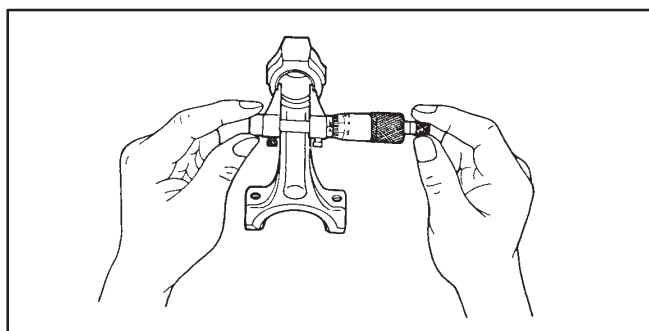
MEASURING CONNECTING ROD PISTON PIN BORE
